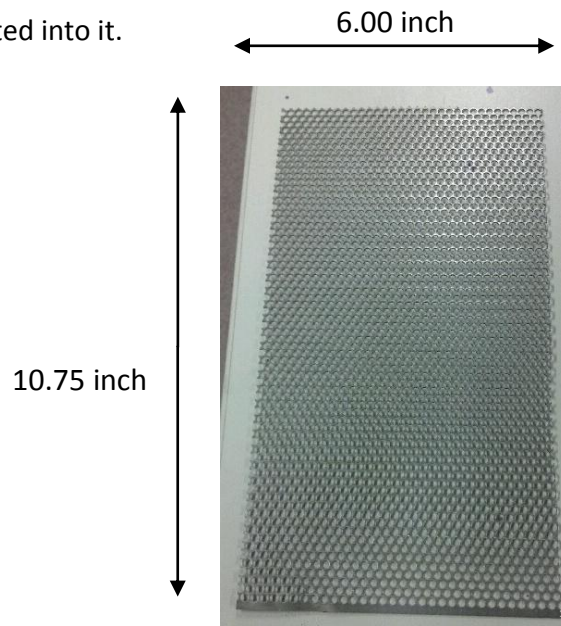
Cut and dimensioned piece that will be inserted into the area in front of the test section. Piece was crafted by cutting down a larger square from McMaster Carr.
